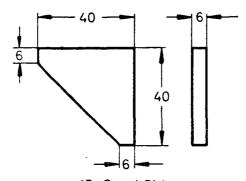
WATER TANK ASSEMBLY PARTS - Contd
